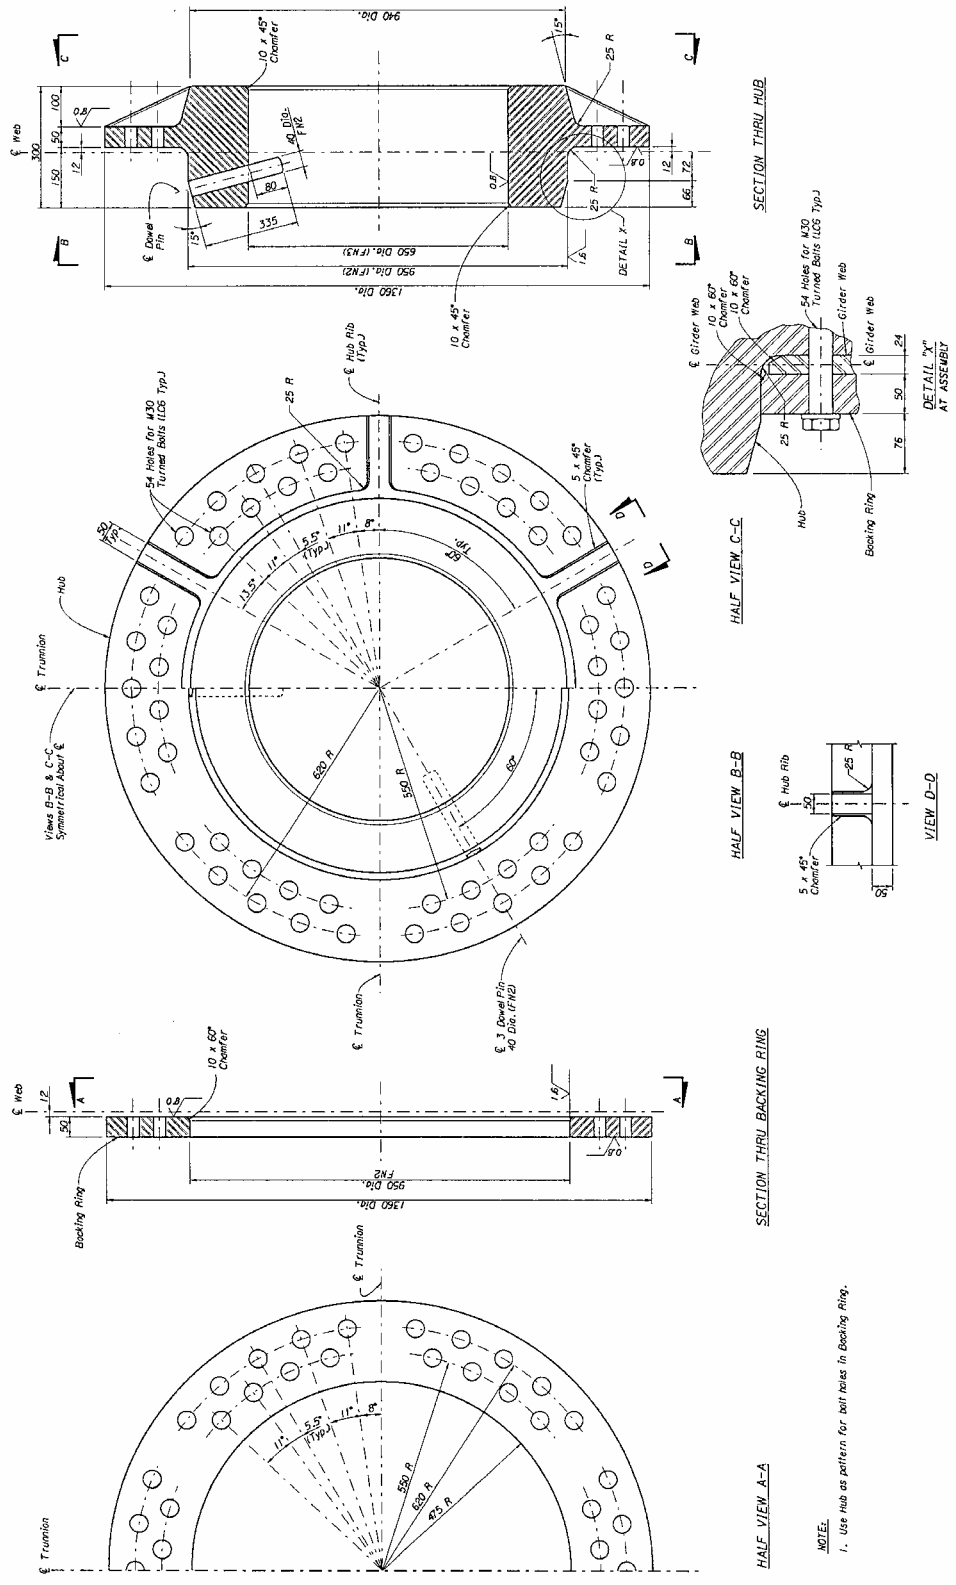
Trunnion-Hub-Girder Assembly of 17th Street Causeway Bascule Bridge [5].
